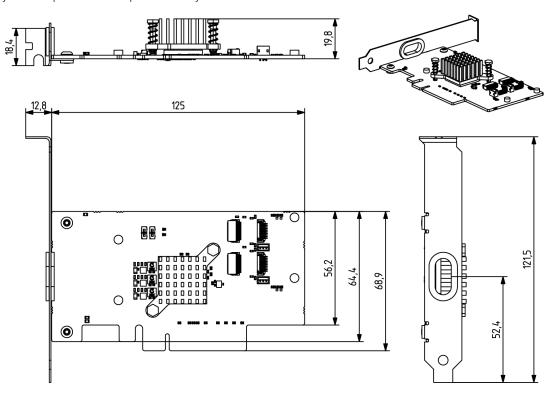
Dimensional drawing of host adapter HA-2P-X4G3-FF-X8G3
